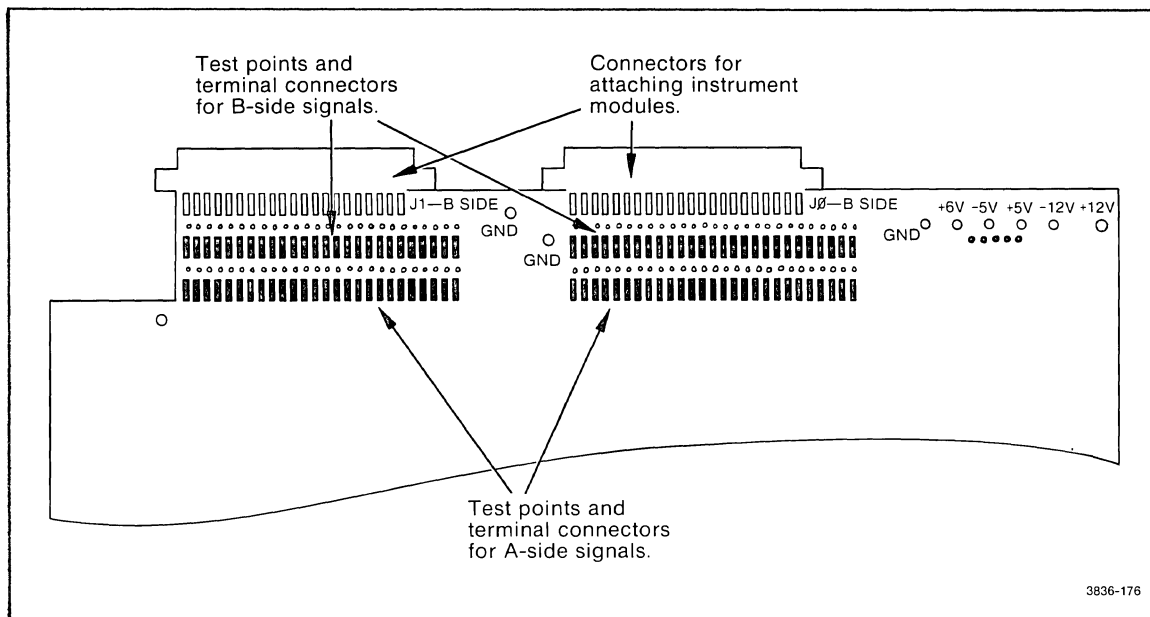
Main extender A-side and B-side terminal connectors and test points.
